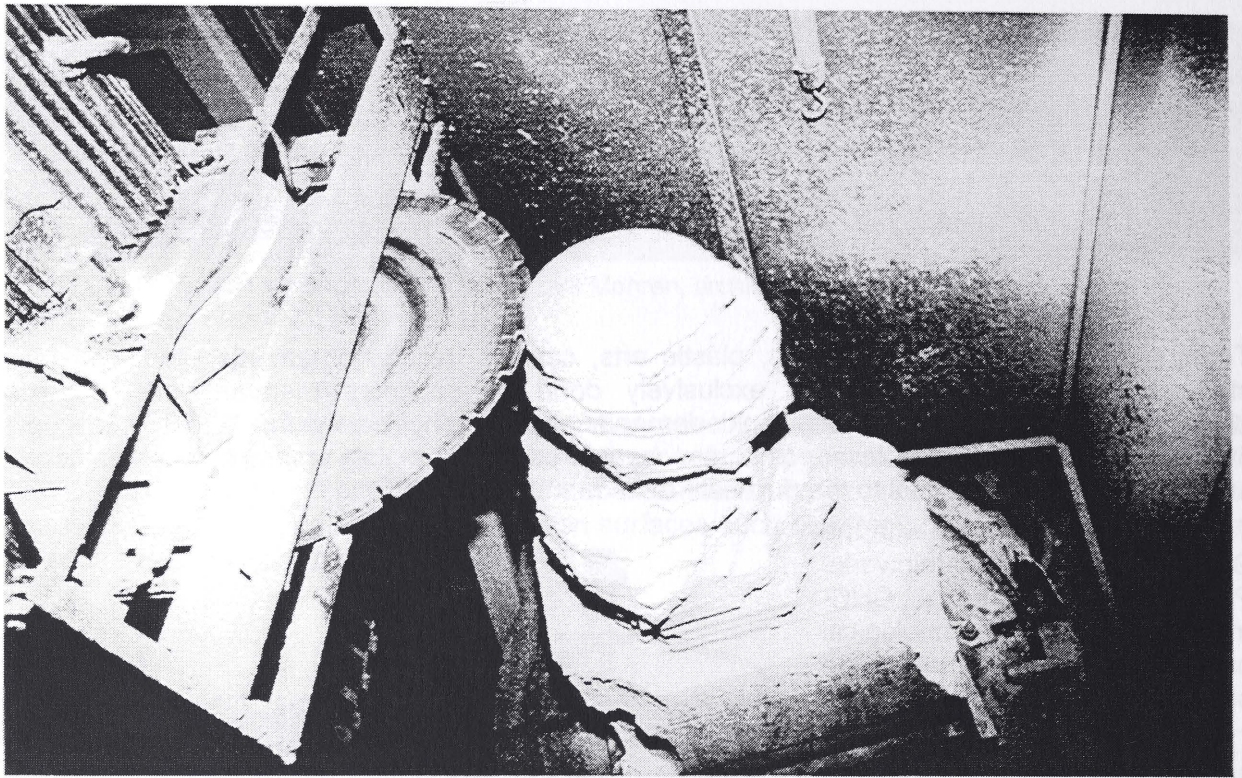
Pre-machining of a sculpture at a CNC stone cutting machine
